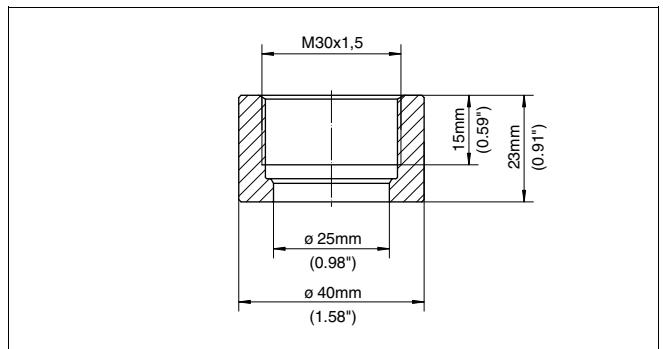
Dimensions welded socket M30 x 1.5 for headbox
